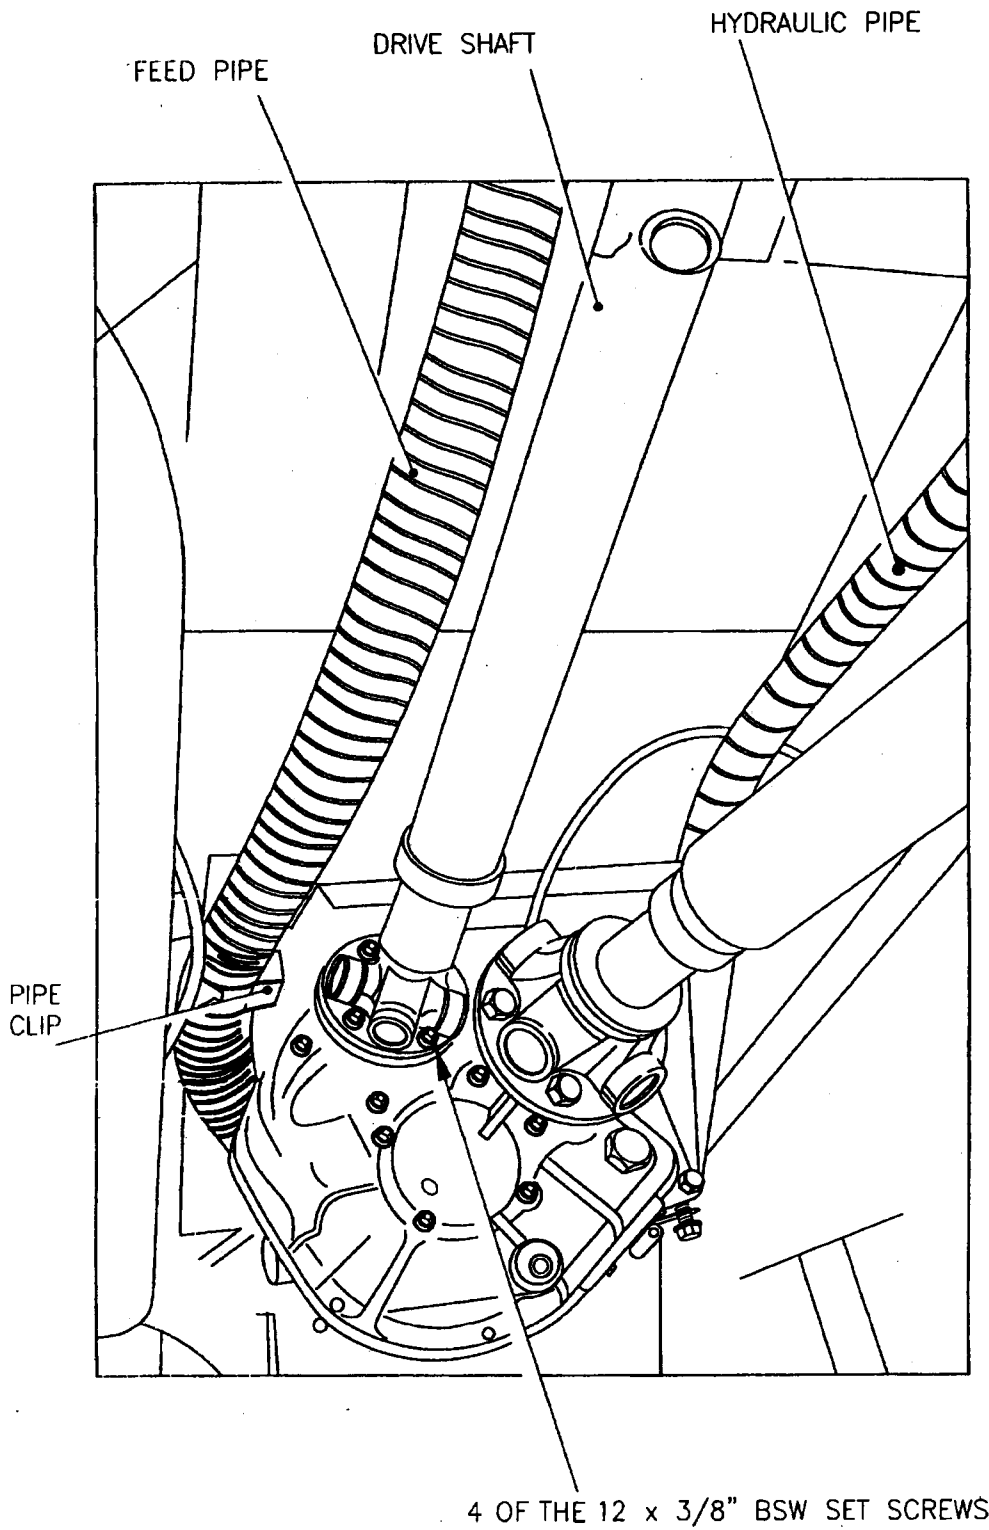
4 x 4 Pump Drive Shaft and feed pipe, looking forward onto back of Gearbox
